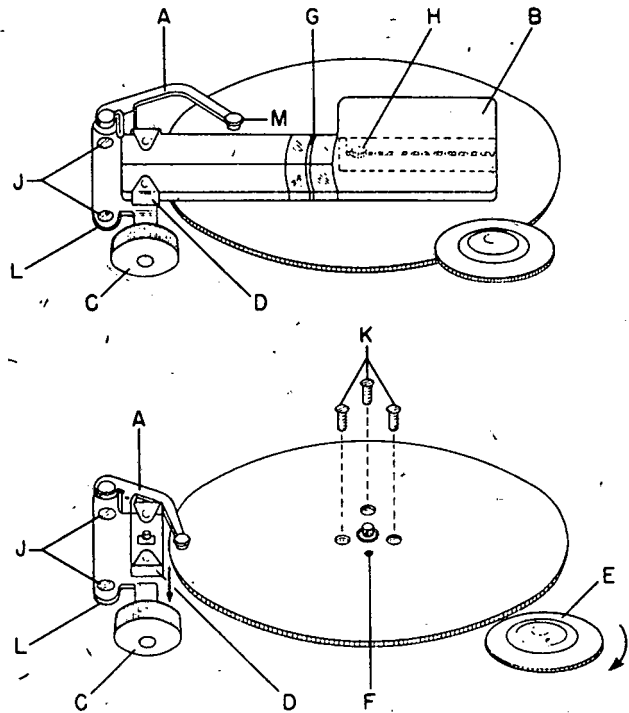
Disassembly of Receiver RR-6-XX dial mechanism
